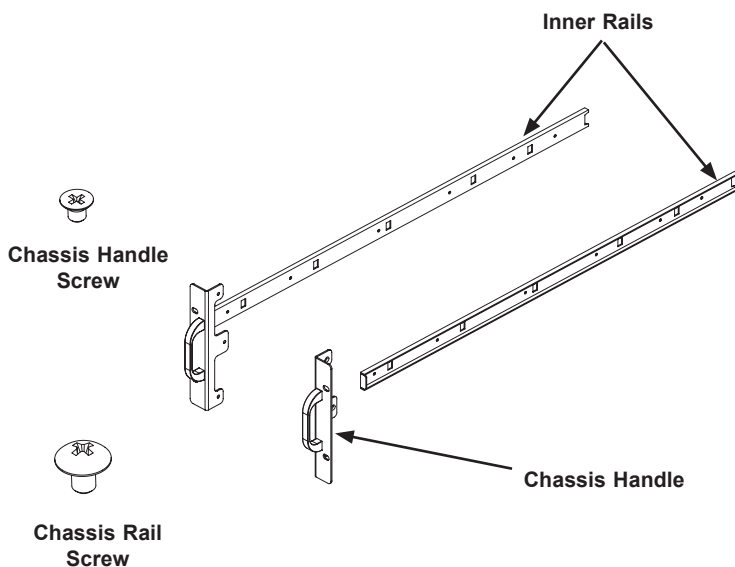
Identifying the Inner Rails and Chassis Handles
